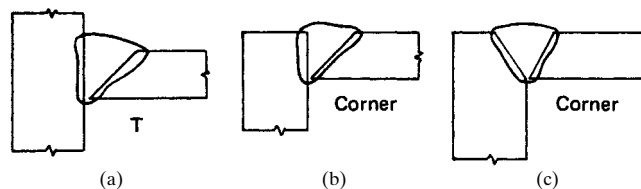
(a) Joint design; (b) weld grooves. (*The Lincoln Electric Company.*)
